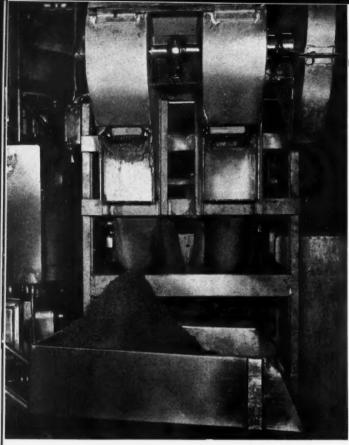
Coolant is Discharged from the Bullard Vertical Turret Lathe at Right into a Tank where Drag Chains Remove Cast-iron Chips from Plates at the Bottom of the Tank
